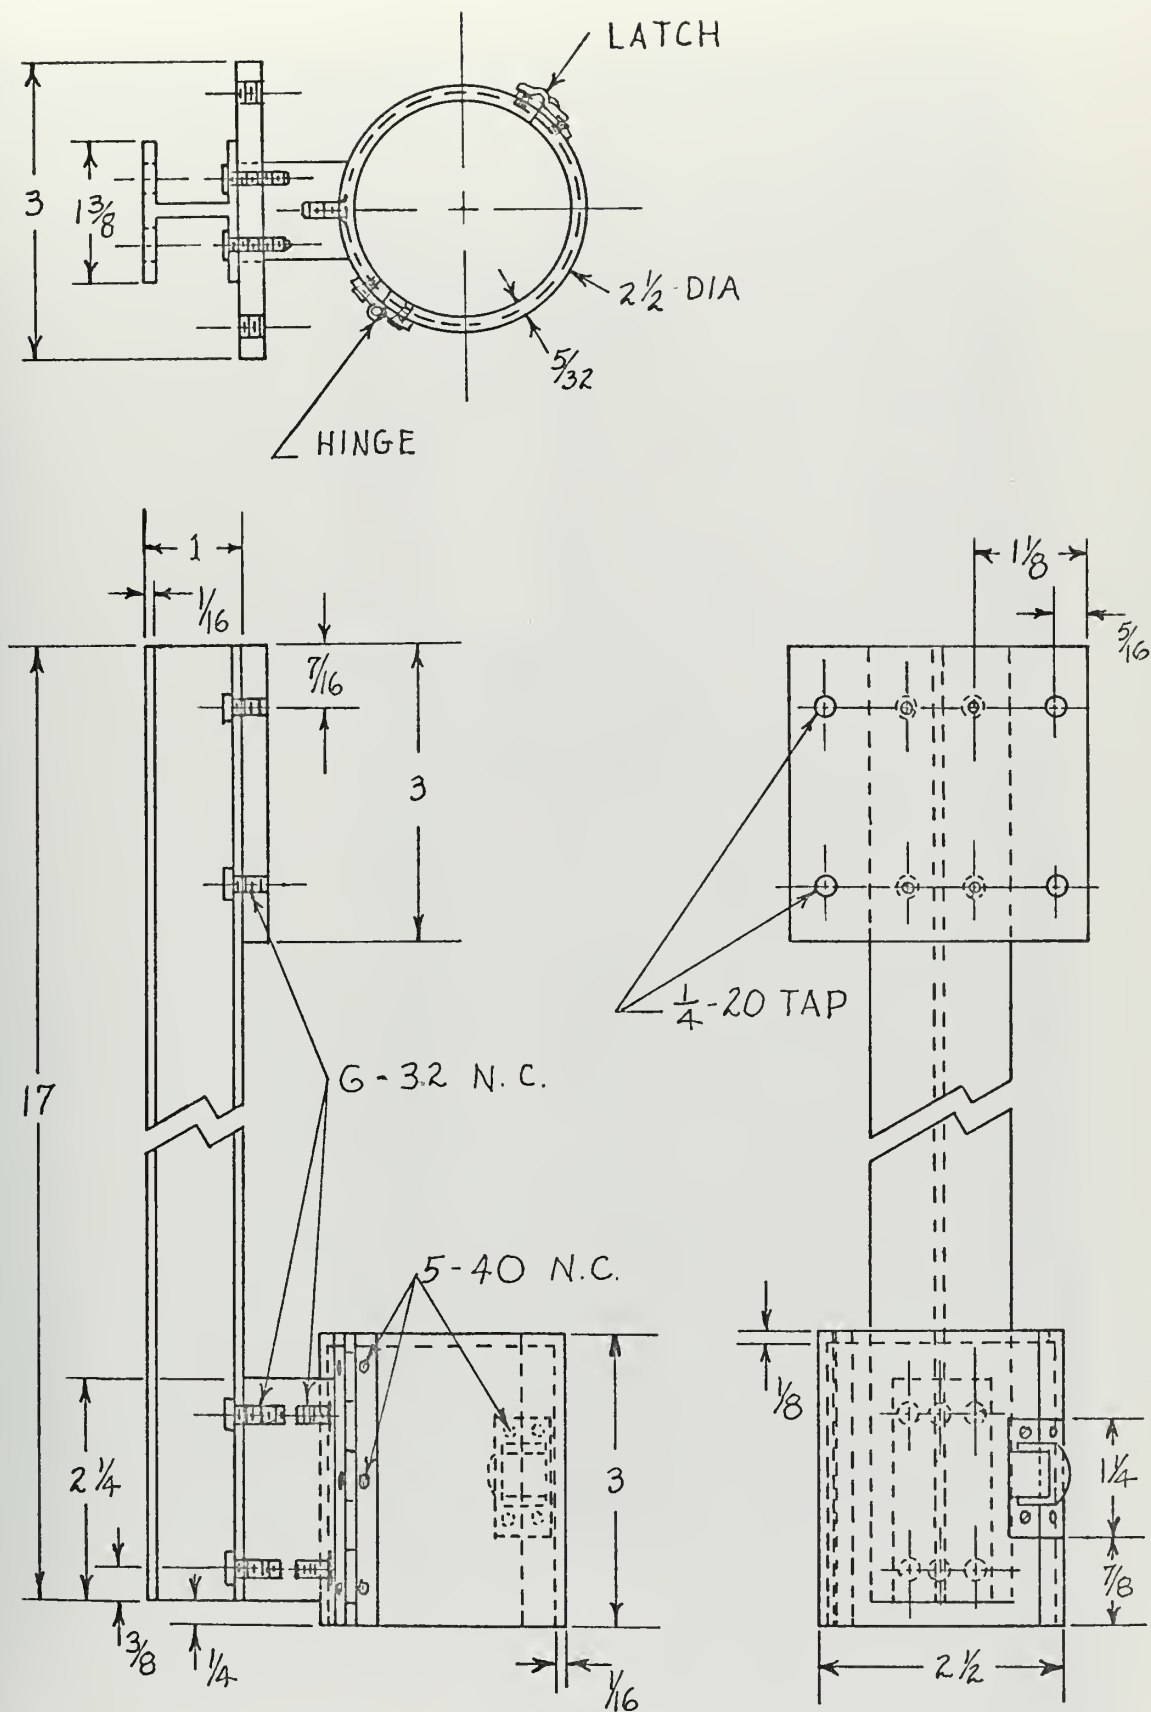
Detail drawing of the core holding bracket for the NPS Vane Shear Apparatus
